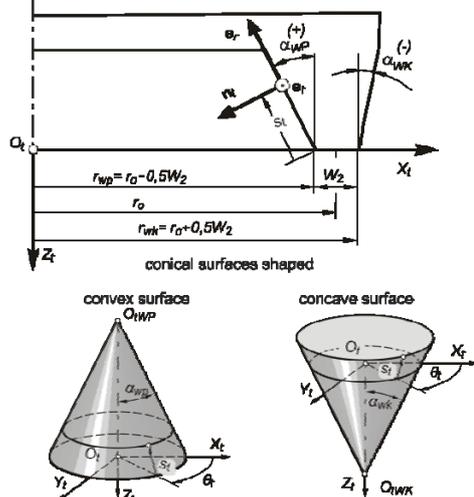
Geometry of conical surfaces forming concave and convex tooth flanks [6]
